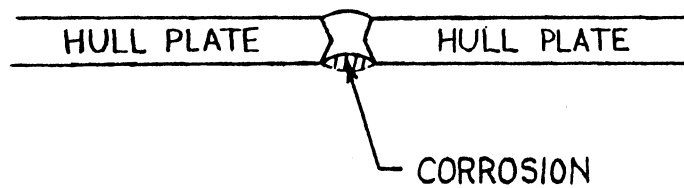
Corrosion of hull plate weld with CP (seawater)
